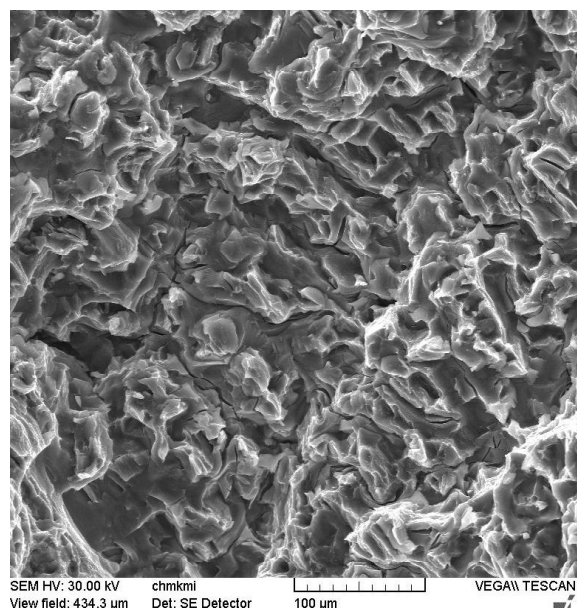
Fracture surface of the AZ91 alloy
